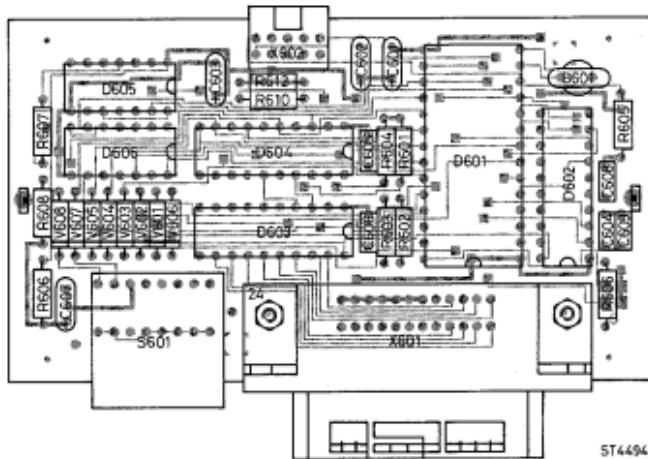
IEC-625/IEEE-488 interface pcb, lay-out, conductor side
